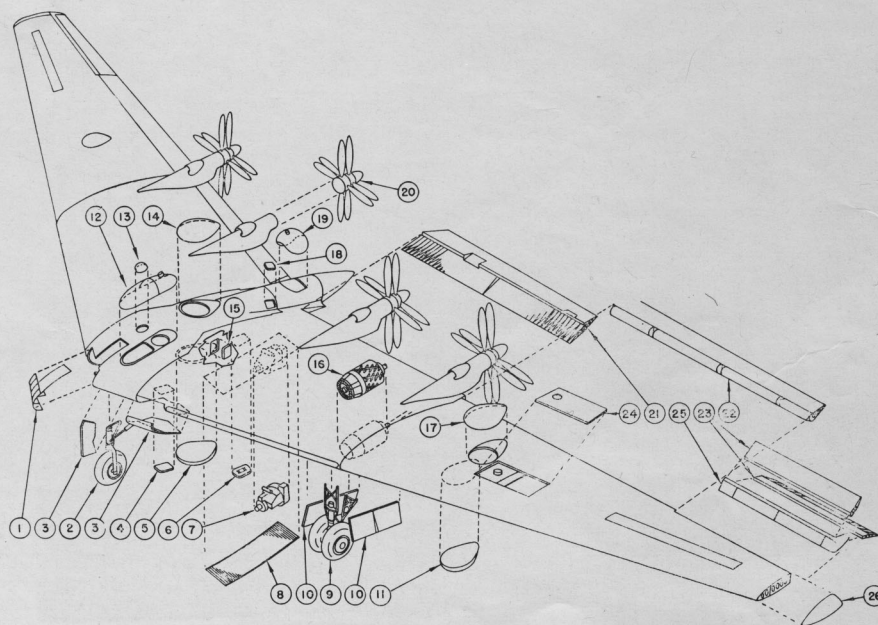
Major assembly breakdown showing arrangement of flaps, elevons, rudders, and trim flaps on the wing. Other features are: (1) copilot's enclosure; (2) nose landing gear; (3) nose landing gear doors; (4) lower escape hatch; (5) nacelle turret-bottom fairing; (6) main entrance hatch; (7) auxiliary power plant; (8) bomb-bay roller door; (9) main landing gear; (10) main gear doors; (11) wing turret-bottom fairing; (12) pilot's enclosure; (13) astrodome; (14) nacelle turret-top fairing; (15) bomb-bay escape hatch; (16) engine (in the jet-powered YB-49; "air separators" replace propeller shaft nacelles with four TG-180 engines installed in between); (17) wing turret-top fairing; (18) upper escape hatch; (19) sighting station, upper enclosure; (20) propellers, including gearbox; (21) landing flap; (22) elevon; (23) rudder; (24) fuel tank door; (25) trim flaps; (26) wing tips.
